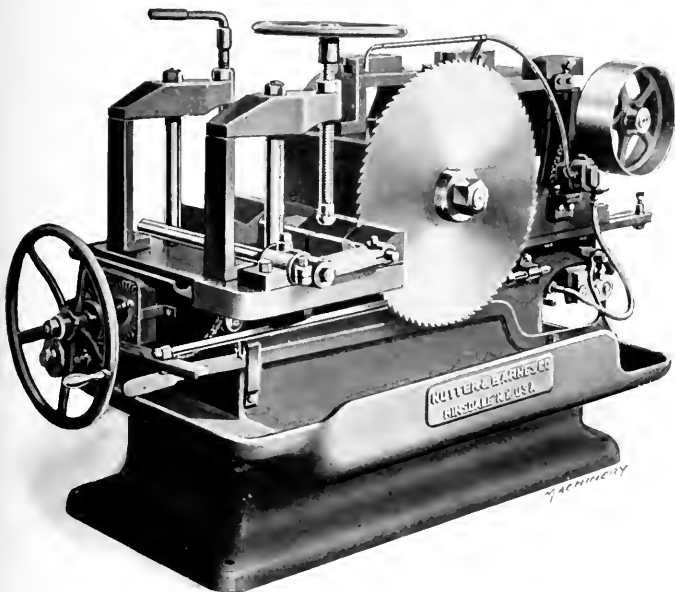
Nutter & Barnes 10-inch Cutting-off Machine
